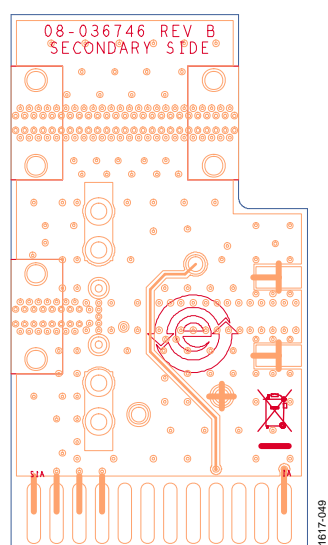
ADL6010 Evaluation Board Layout, Bottom Side
